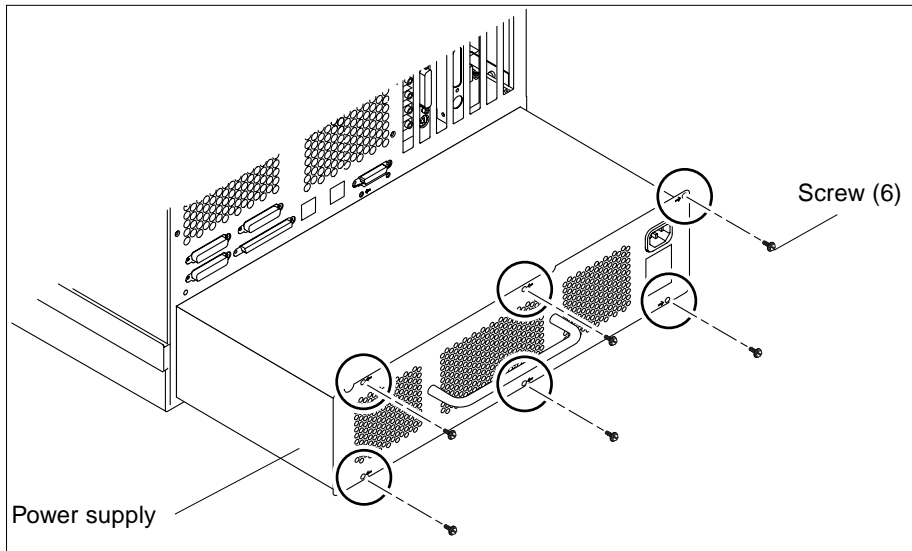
Removing and Replacing the Power Supply Assembly (Sheet 2 of 2)
